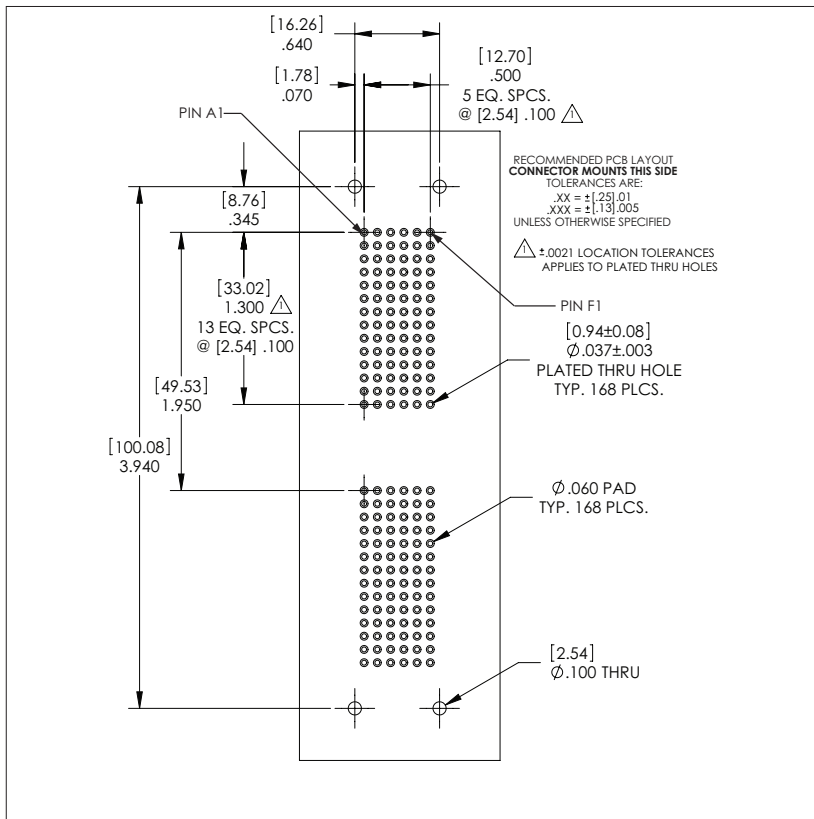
Figure A. PCB layout for i2 receiver, Part # 310 130 101. Thru hole and pad diameters are for VPC QuadraPaddle male Adapter Contact, Part # 610 138 117. The size of these holes may be different if a header from a different manufacturer is used. Connector mounts this side.
